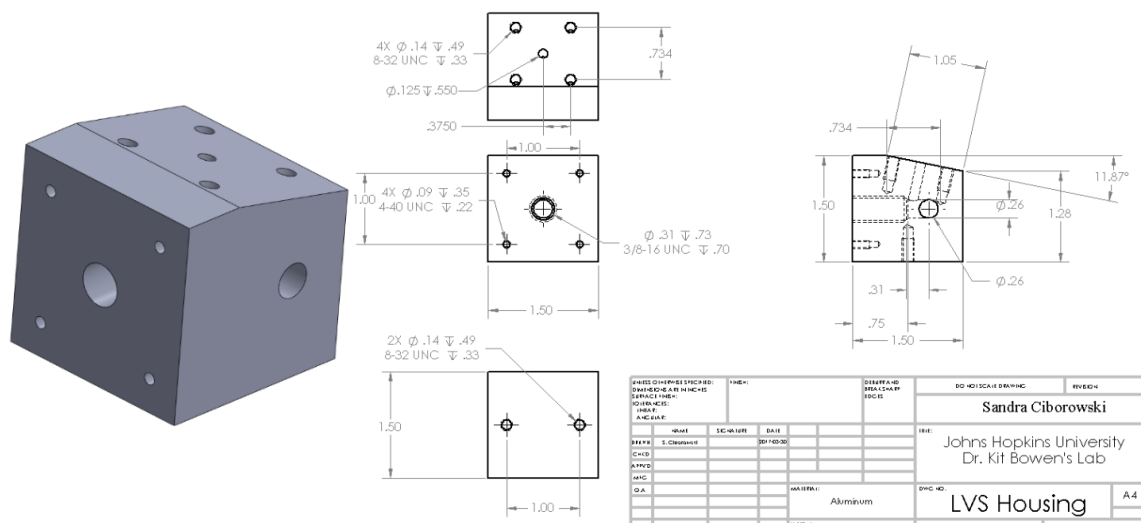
Part and Schematic Drawing of the Lai-Sheng Wang-Inspired Housing.
